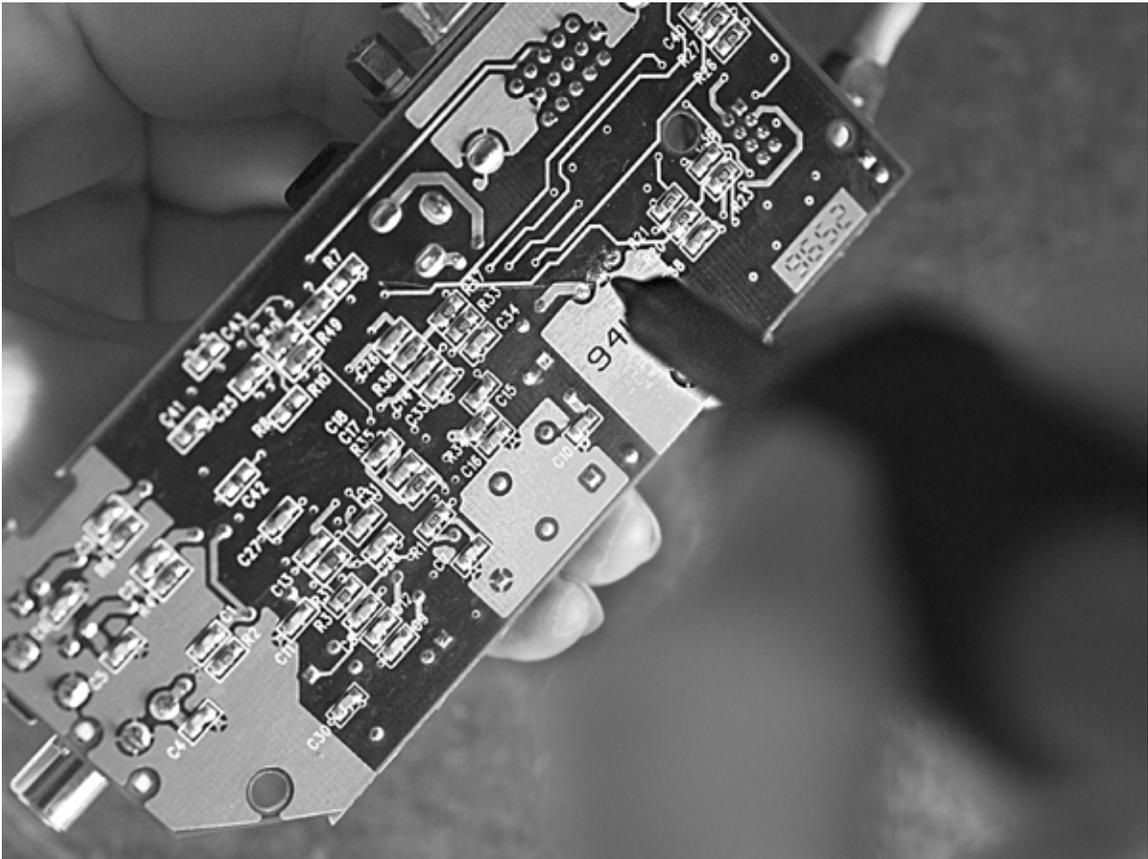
Desolder the 7805 linear regulator and replace with ISR.
